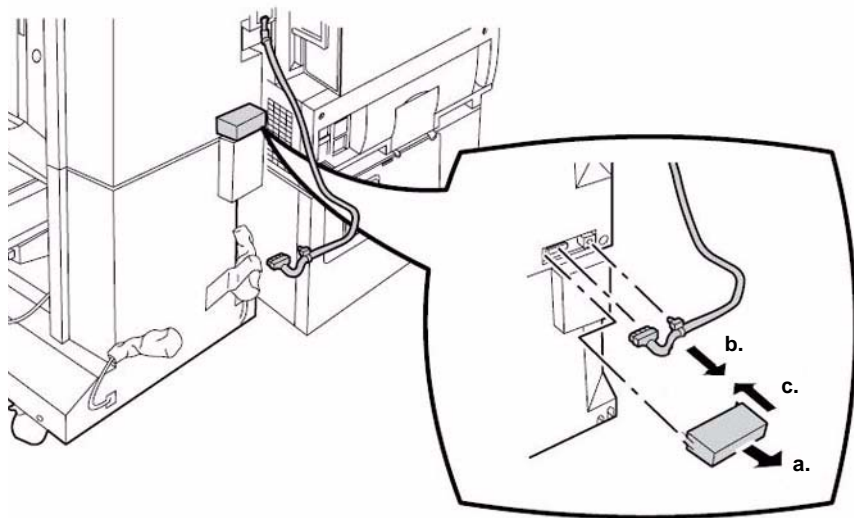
H-Transport Assembly to Finisher Wire Harness Connectors
